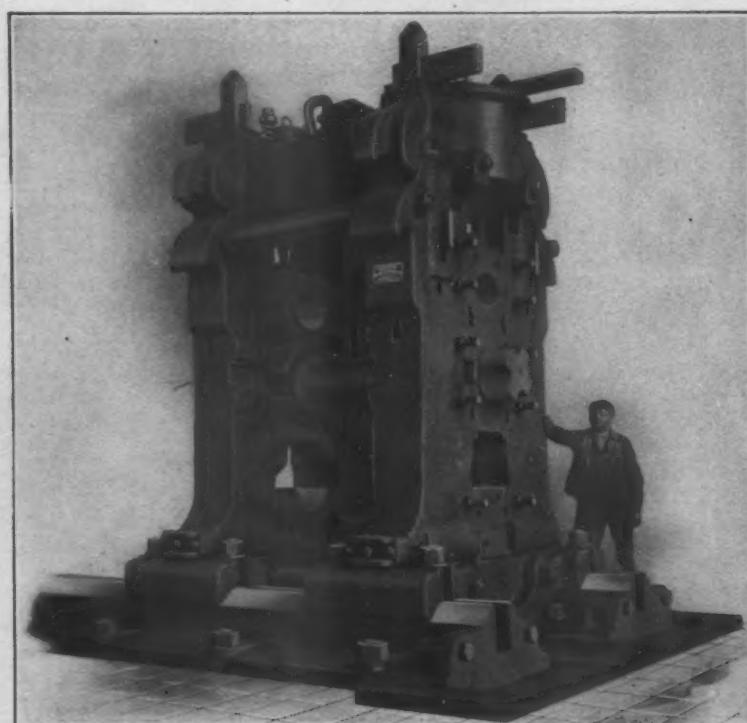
The 28-In. Three-High Rail Mill Housings.
